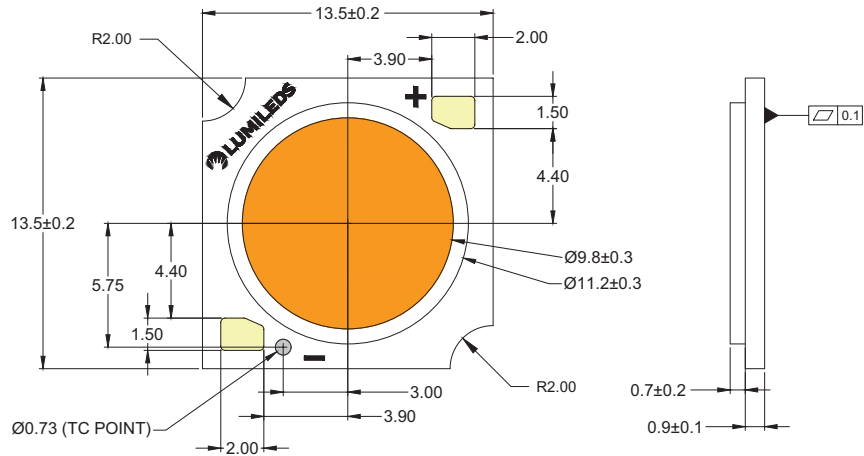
Mechanical dimensions for L2C6-xxxxxL02x0900, L2C6-xxxxxL03x0900 and L2C6-xxxxxL04x0900
